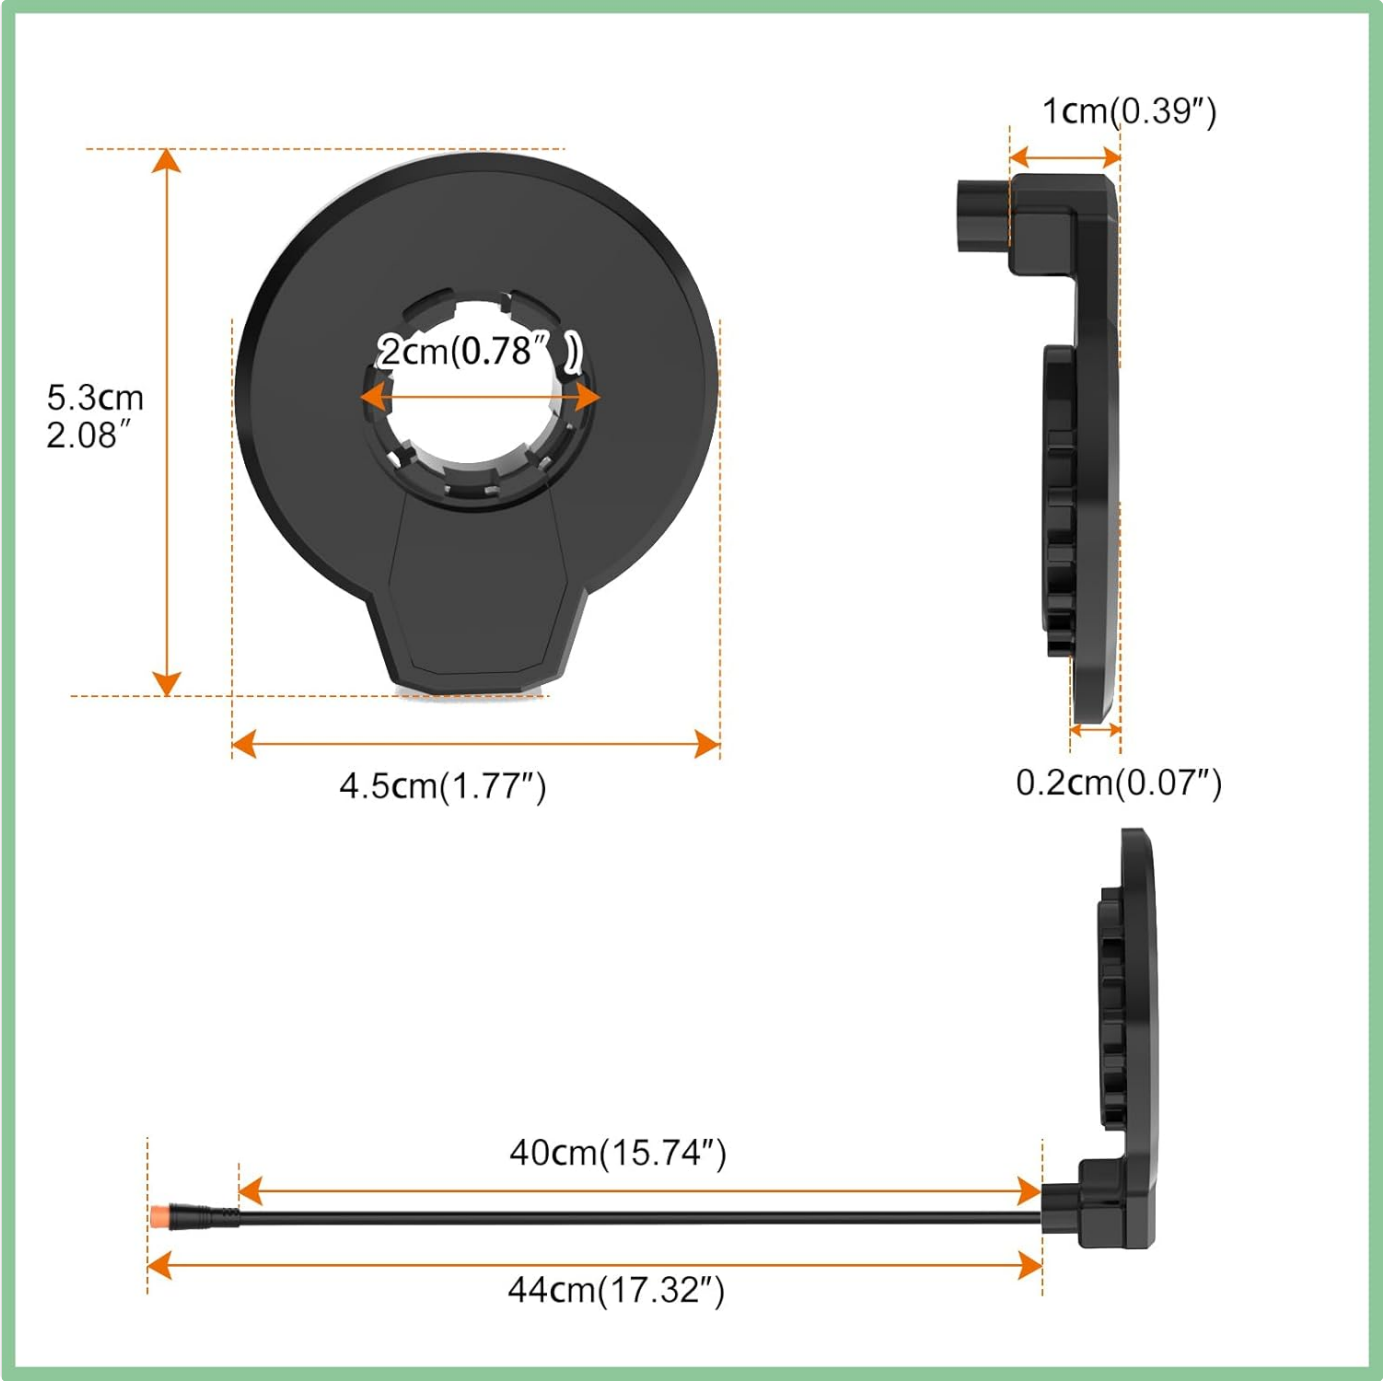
Dimensional drawing of the PAS sensor, showing key measurements in centimeters and inches.
